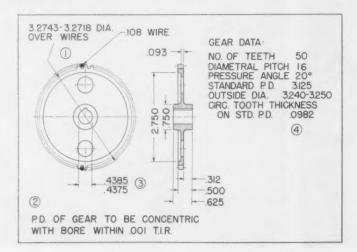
Four errors on this spur gear drawing concern wire measurement, bore tolerance, run-out total indicator reading, and tolerance for the circular tooth thickness.
